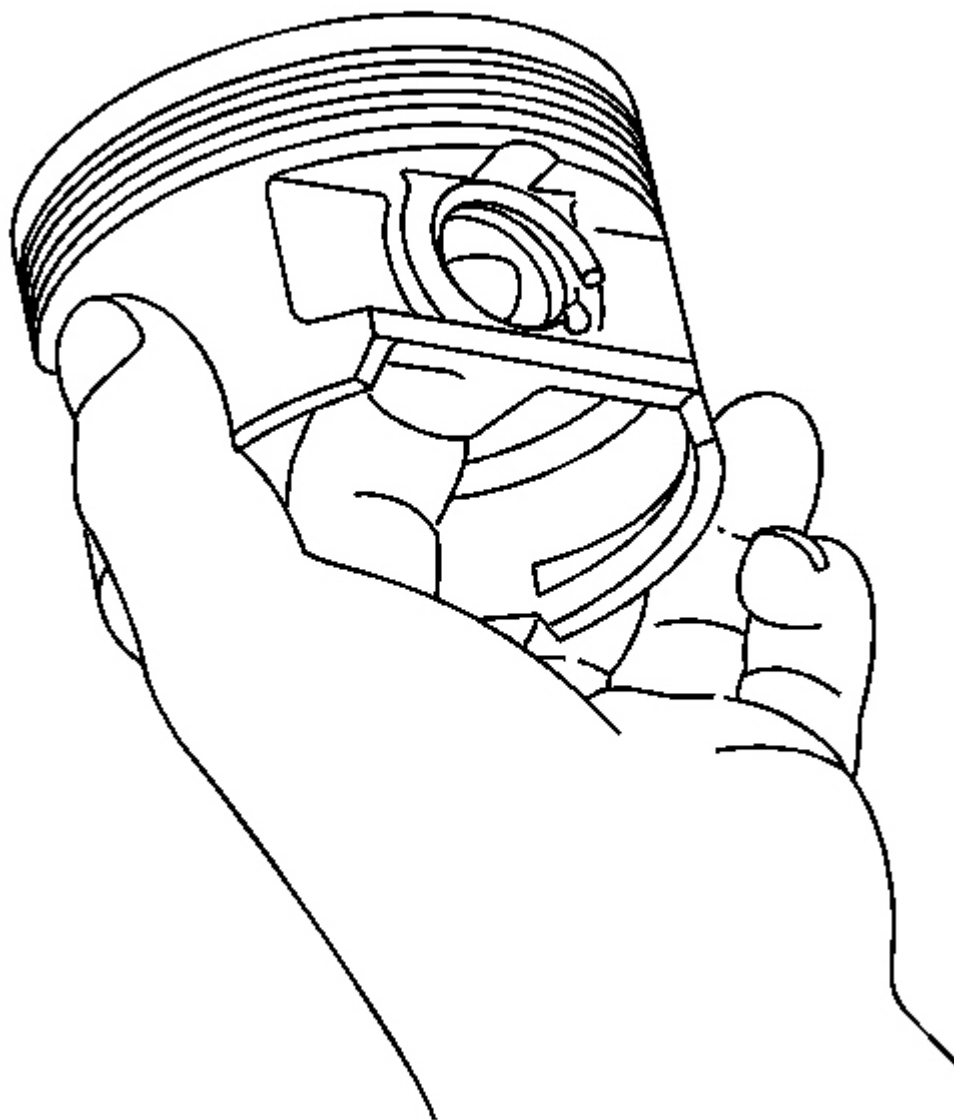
View Of Retaining Clip In Pin Bore Groove
